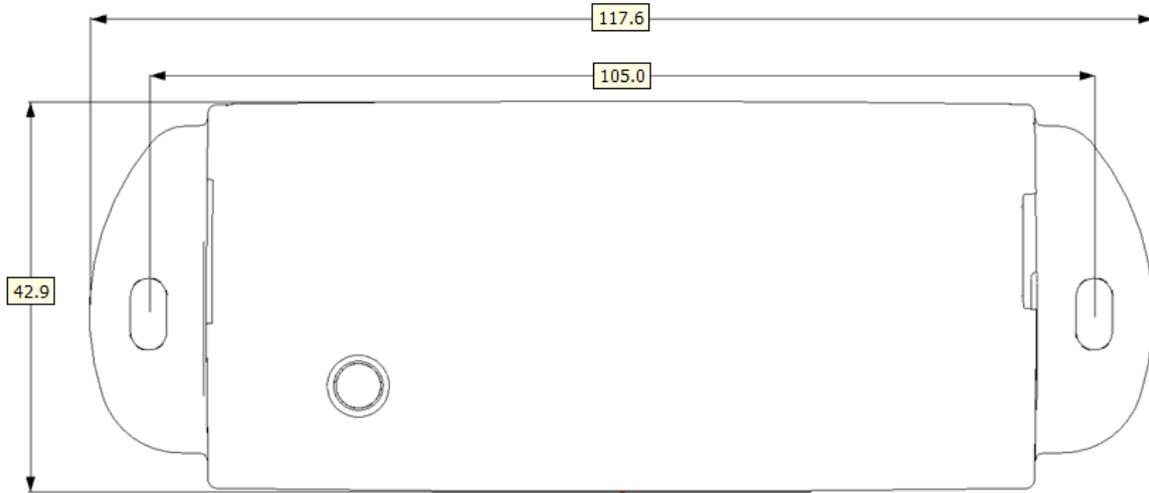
LDSBUS Thermocouple Sensor Adapter Dimension – Top View
